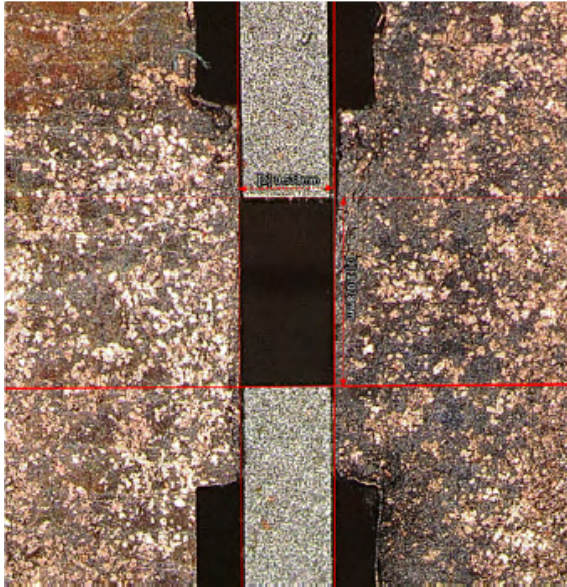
Nozzle exit after assembly by Hutten [11]
